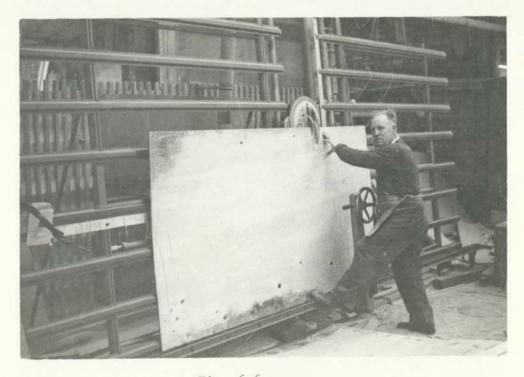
Plywood sheathing being cut to size on a vertical panel saw
